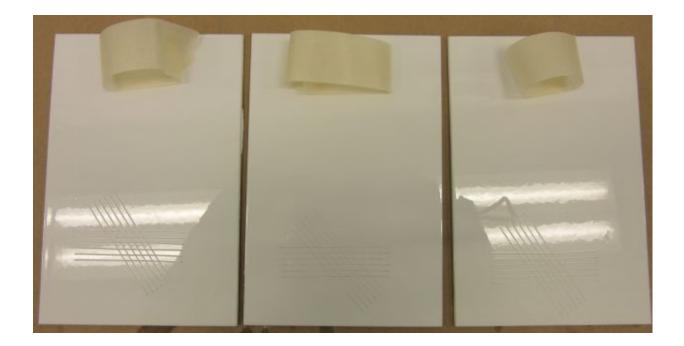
Adhesion testing of composite panels coated with protective coating and an assembly topcoat
